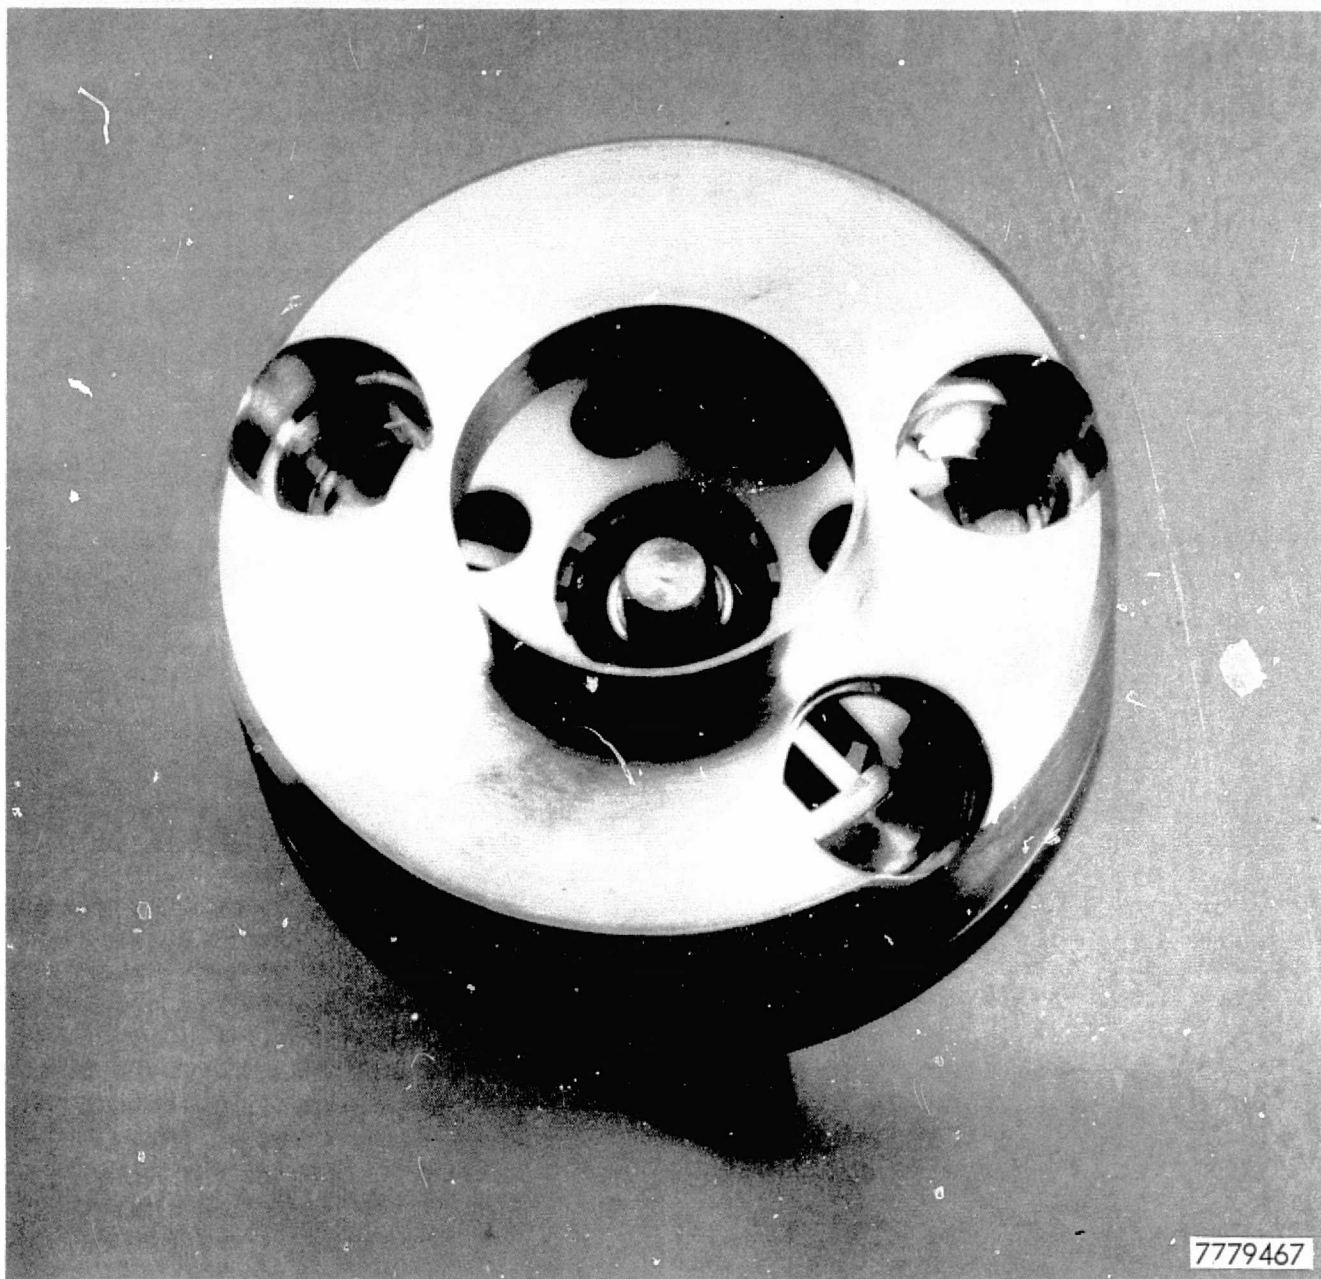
Brazed Anode and End-Dome Assembly. This is the first brazed assembly. The cathode is not a part of that assembly but is shown for orientation purposes.
